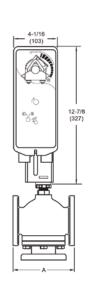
Mx40-717x with VB-8303 Flanged 3-Way Globe Valves
